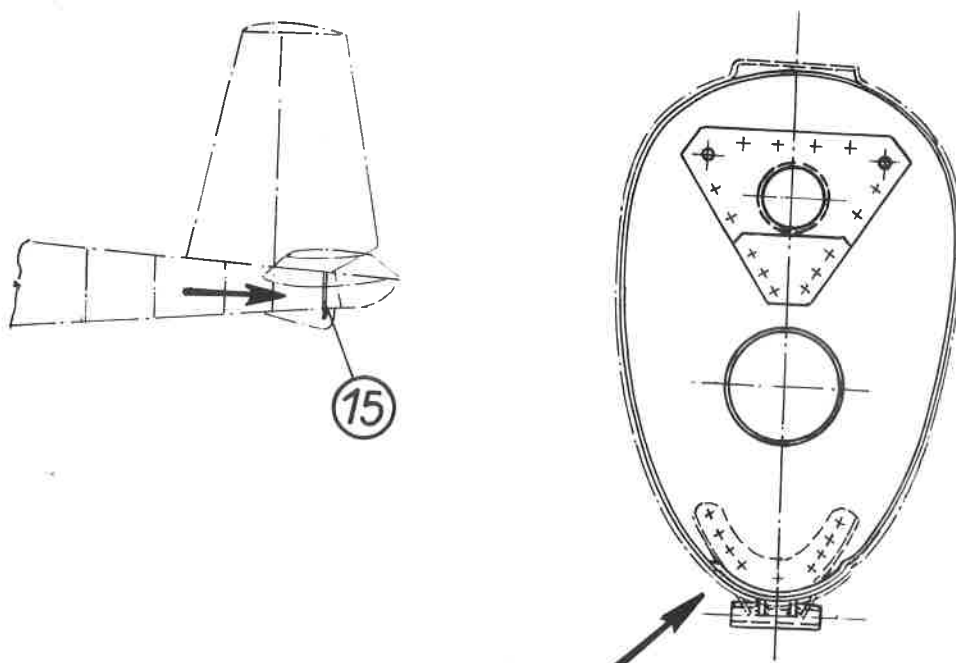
Check of the fuselage frame No. 15 for possible cracks within the tail skid mounting structure.
